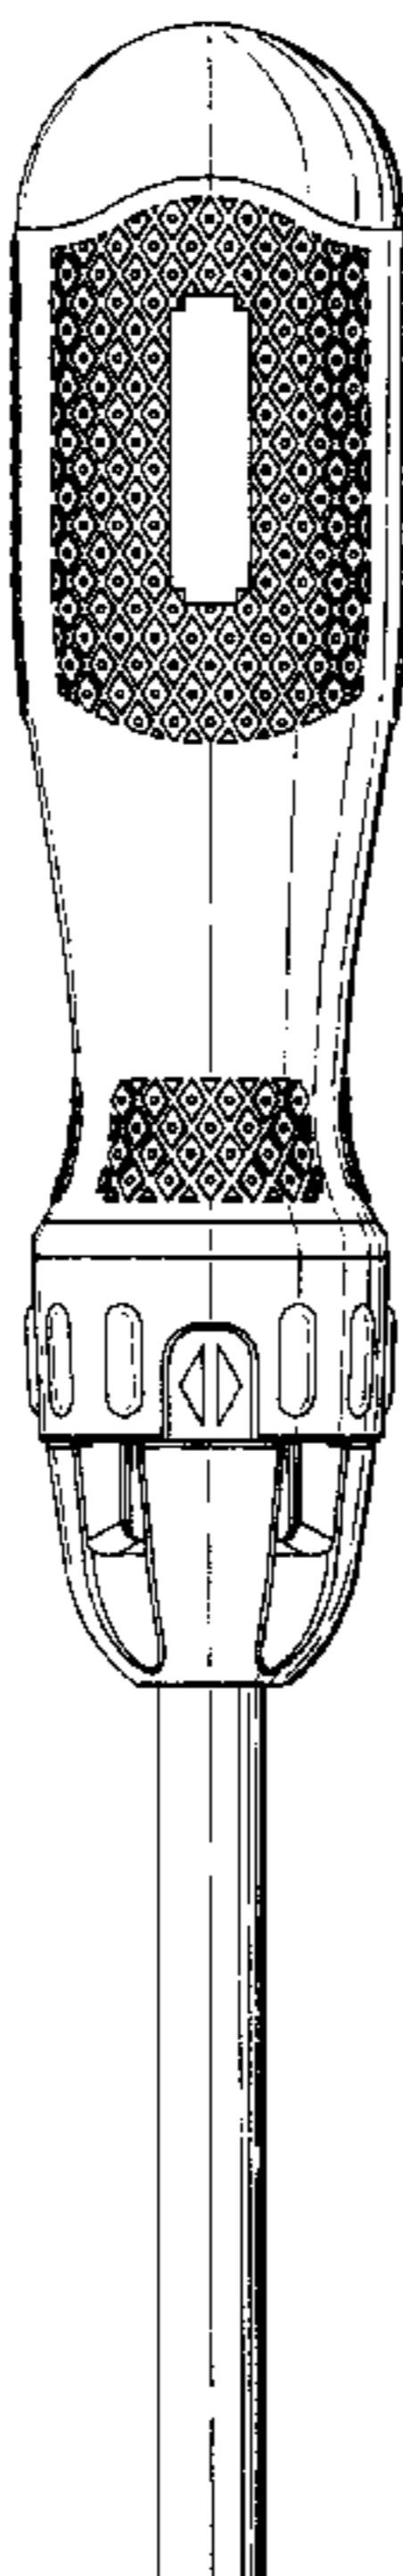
is an elevational view of another embodiment of a screwdriver for interchangeable bits showing our new design; FIG. 8 is an elevational view of the screwdriver for interchangeable bits rotated 180° from the position seen in FIG. 7; FIG. 9 is a similar elevational view of the screwdriver for interchangeable bits rotated 90° in a counter clockwise direction from the position seen in FIG. 7;
